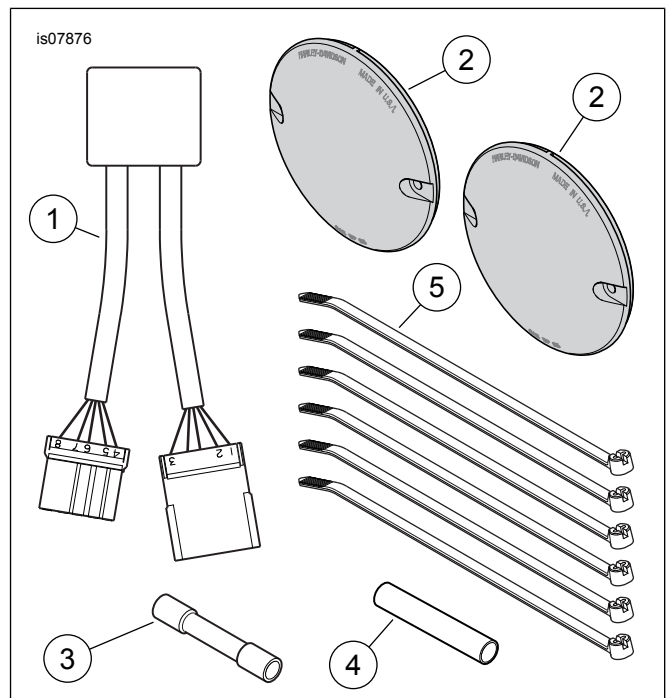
Service Parts, Auxiliary Brake/ Run/ Turn Signal Conversion Kit
